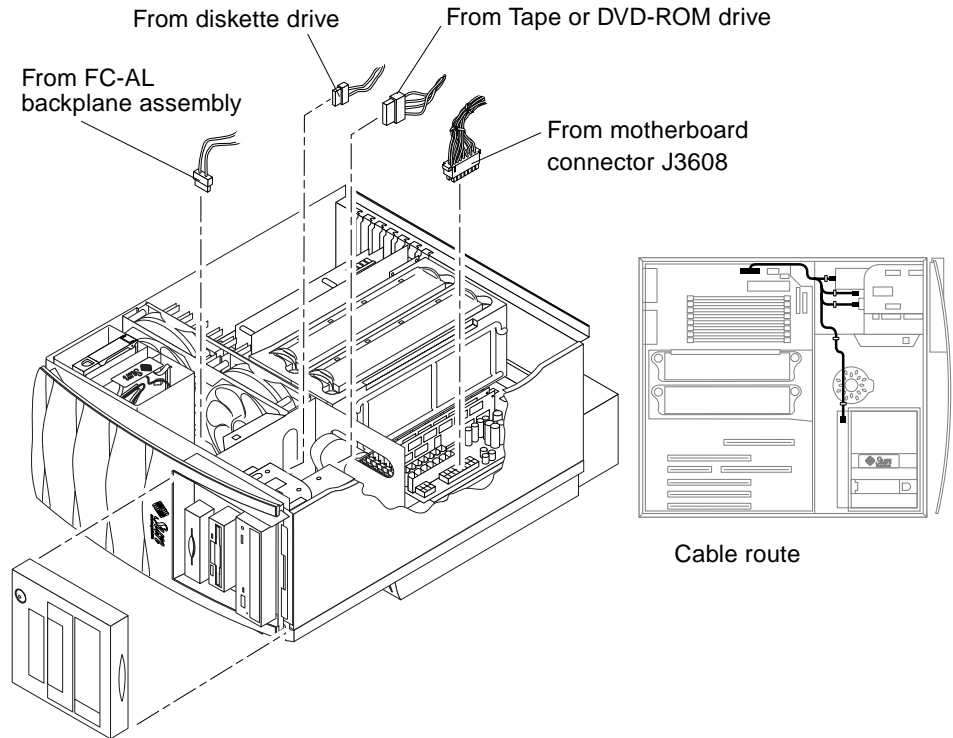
Removing and Replacing the Peripheral Power Cable Assembly
